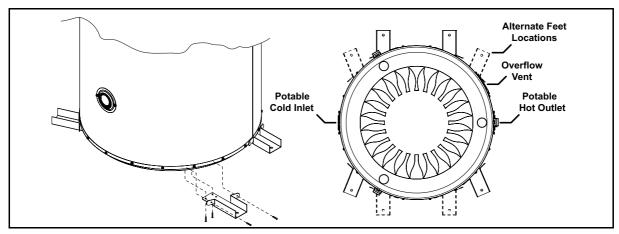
DDHEX250 Vented Tank Feet Fitment
